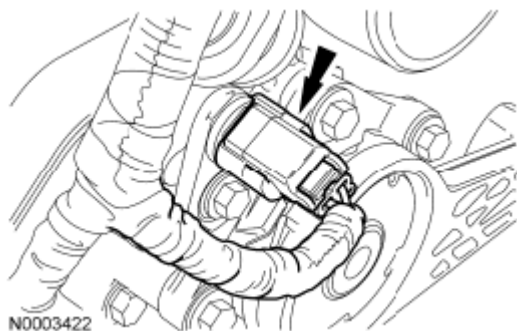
Locating RH Camshaft Position (CMP) Sensor Electrical Connector
